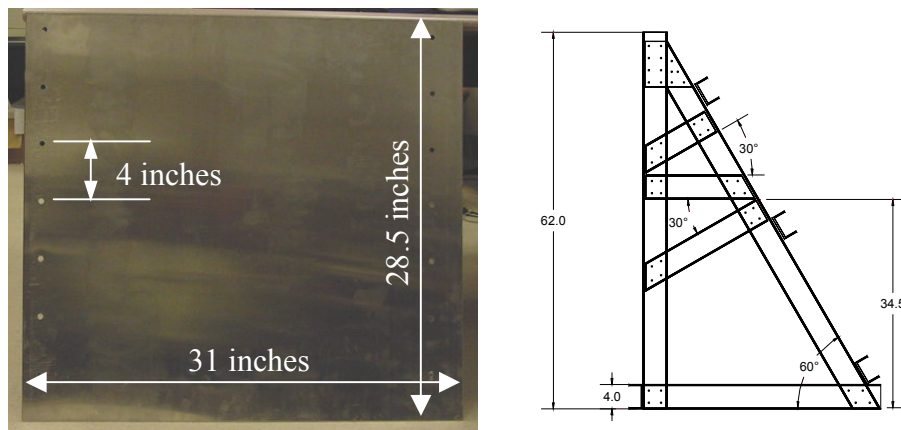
ALUMINUM BULKHEAD AND FIXTURE DETAILS
